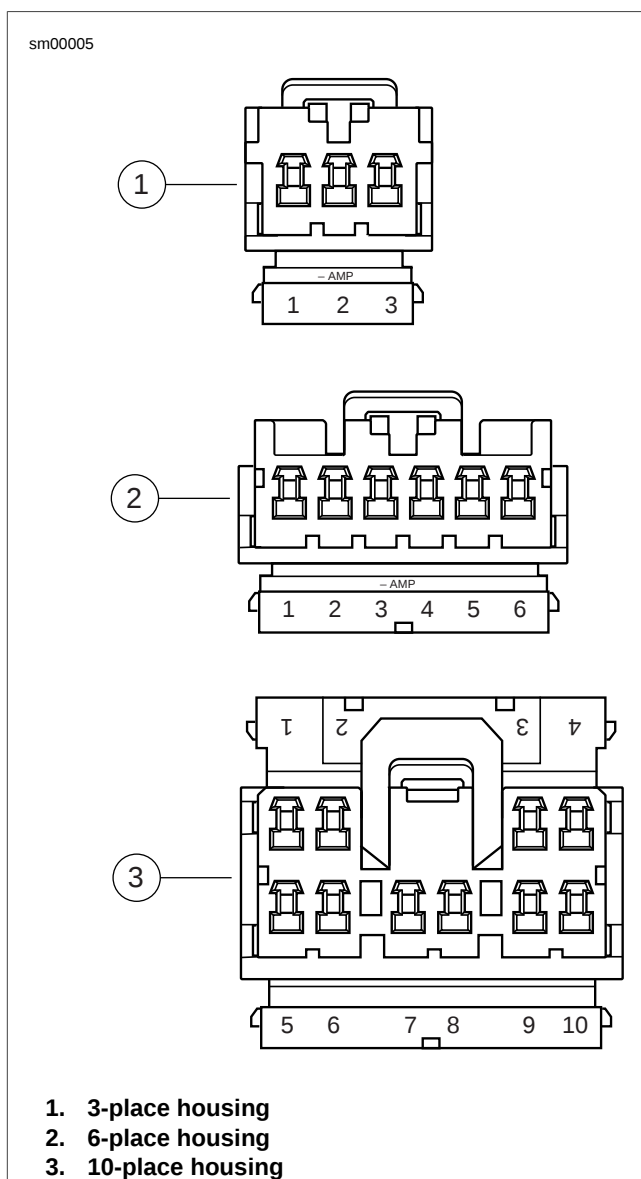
Tyco 070 Multilock Unsealed Connector:
